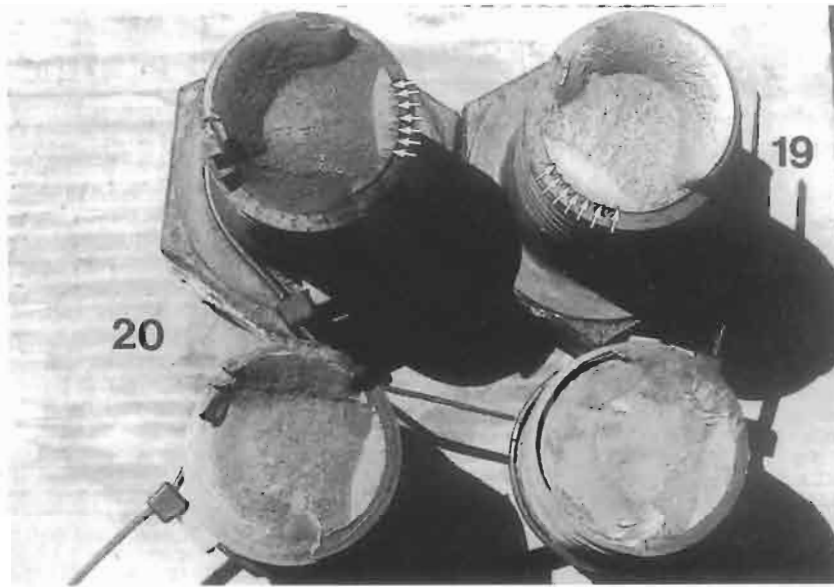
Fracture surfaces of bolts 19 and 20, showing areas of fatigue from multiple origins (arrowed).
